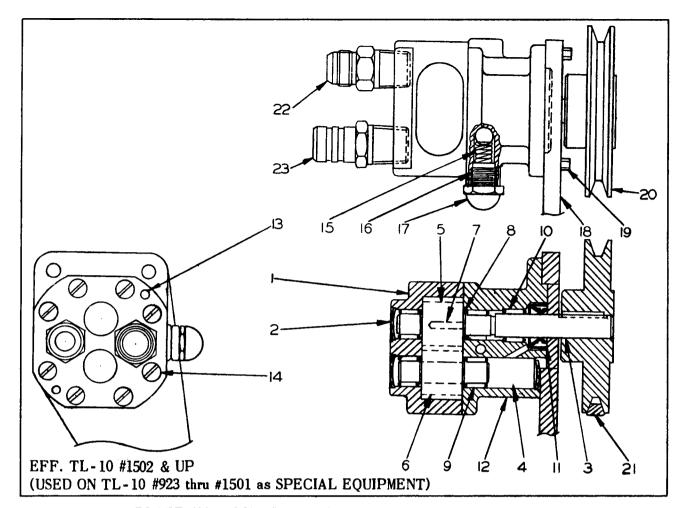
CONVERTER PUMP MOUNTING AND DRIVE GROUP
